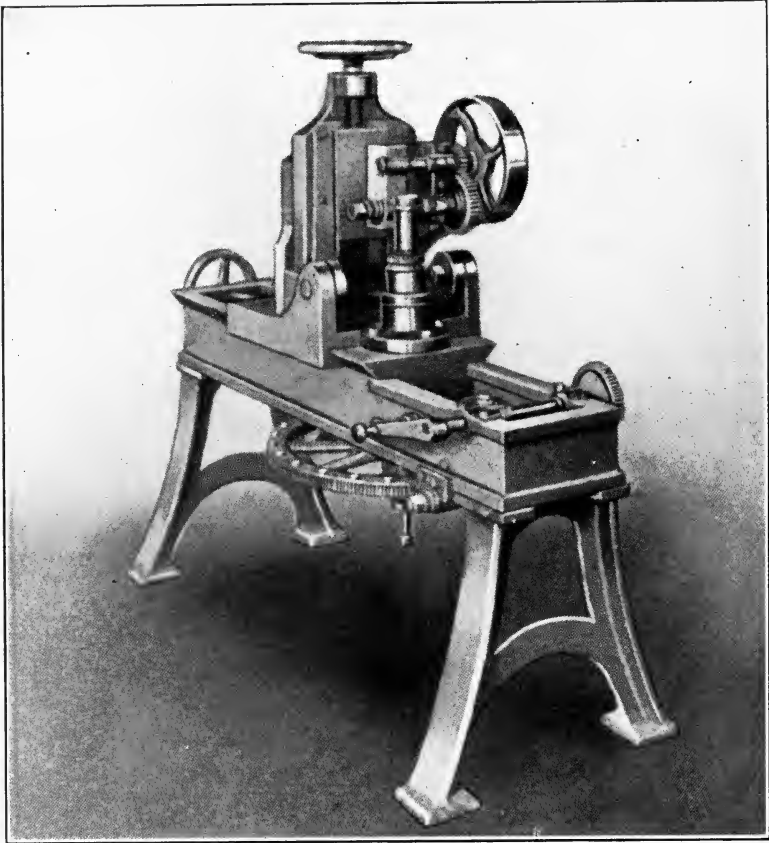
Freeland gear cutting machine known to have been in use in 1857.
